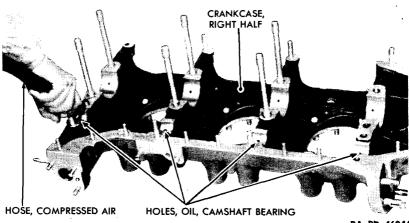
Rear of Right Crankcase, Showing Oil Holes
